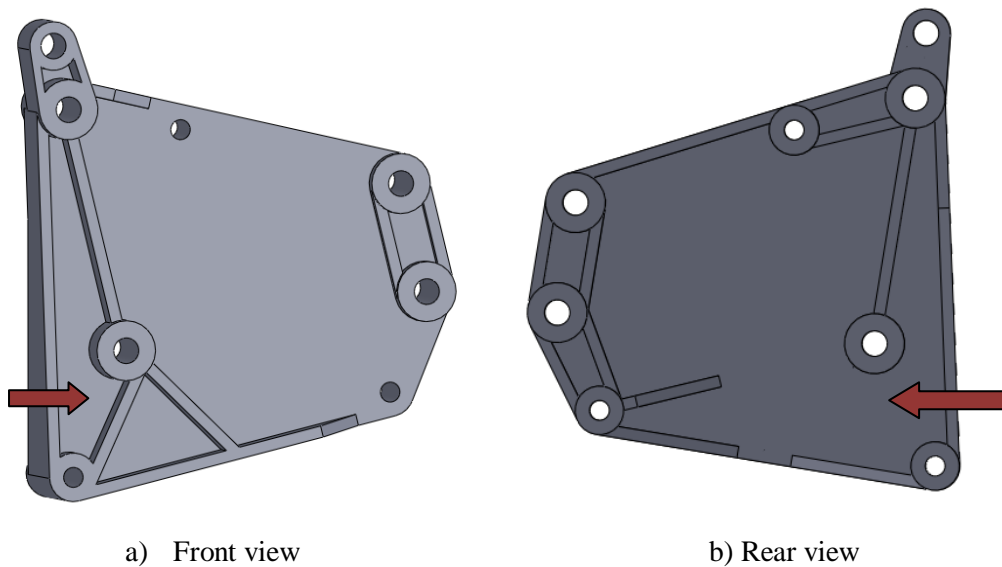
‘Hole to Hole’ ribs removed from exits CAD model
